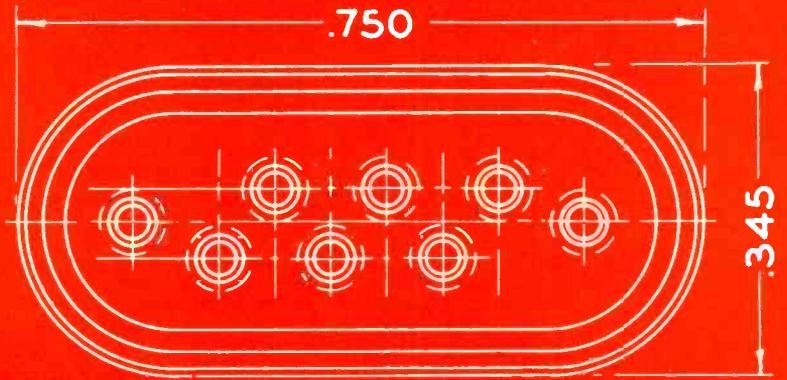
Schematic-mechanical drawing of the special cathode ray tube
